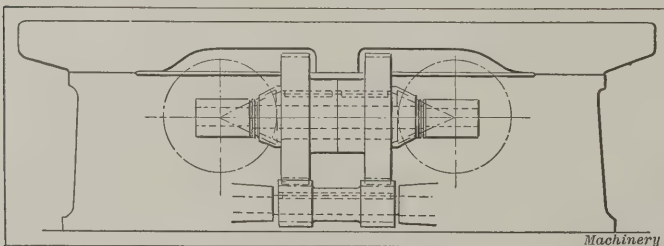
Twin-screw Planer with Drive having Thrusts Equalized
